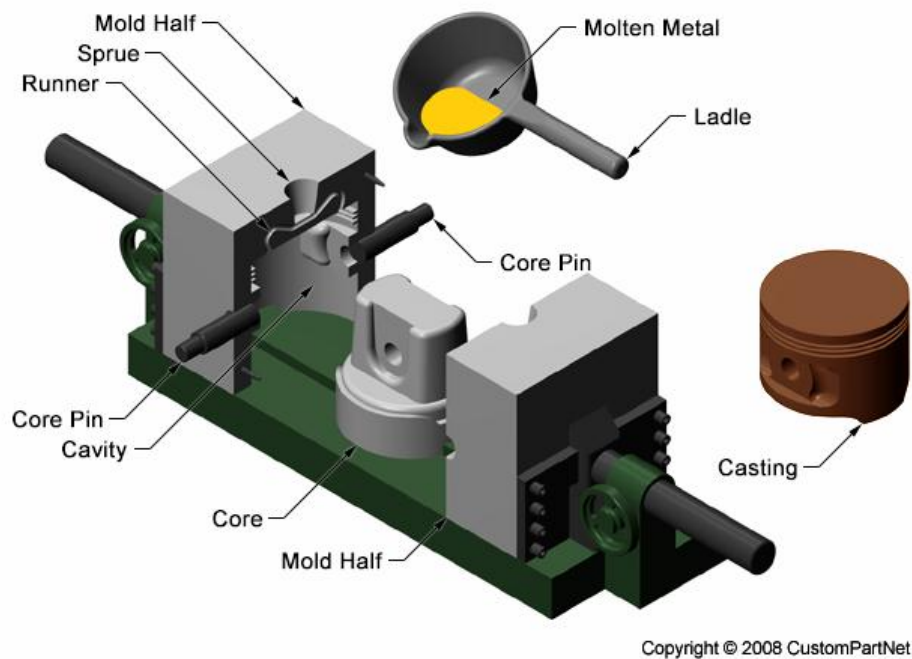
Schematic view of Permanent Mold Casting Process [22].
